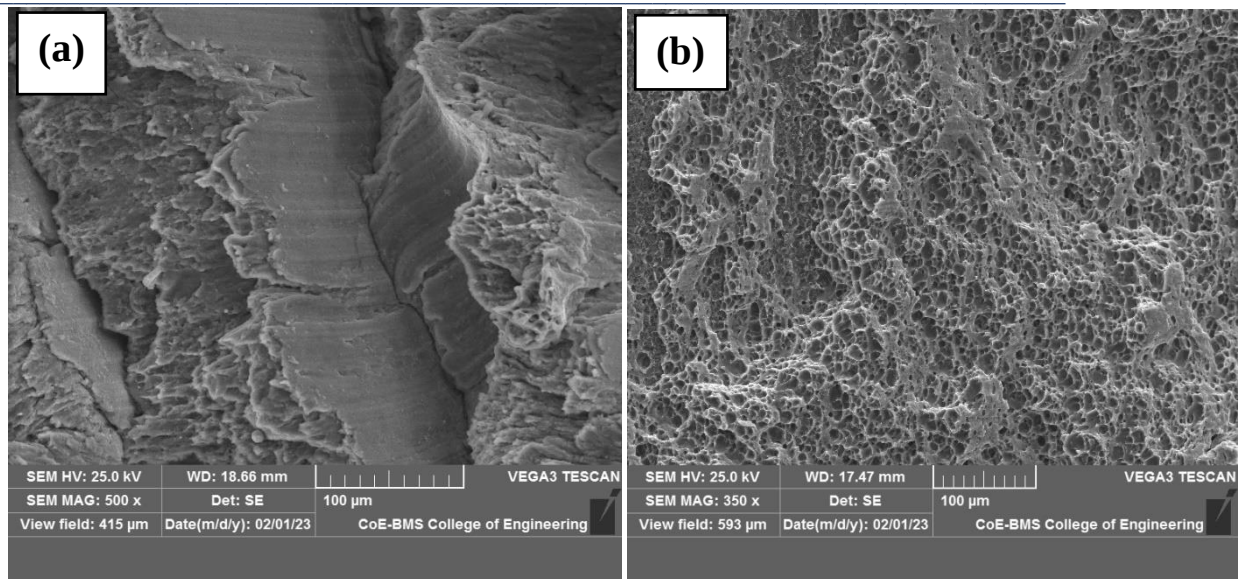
Fracture analysis of (a) base material AA6082-T6 (b) FSW of AA6082-T6/fly ash.
